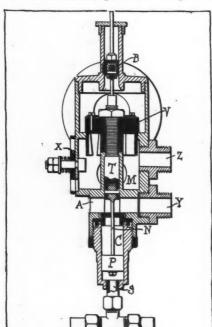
SECTIONAL VIEW OF KEROSENE CARBURETER
